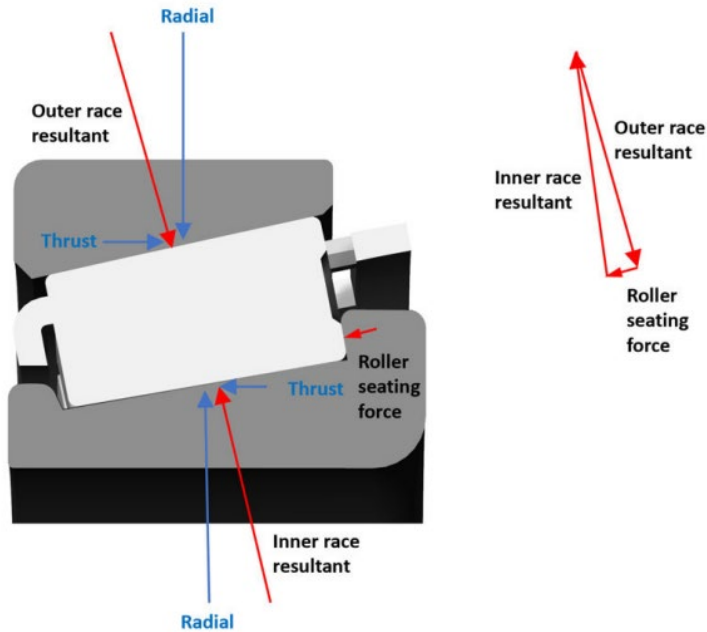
Roller and cone interaction side view showing the seating force caused by the tapered roller angle [30]
